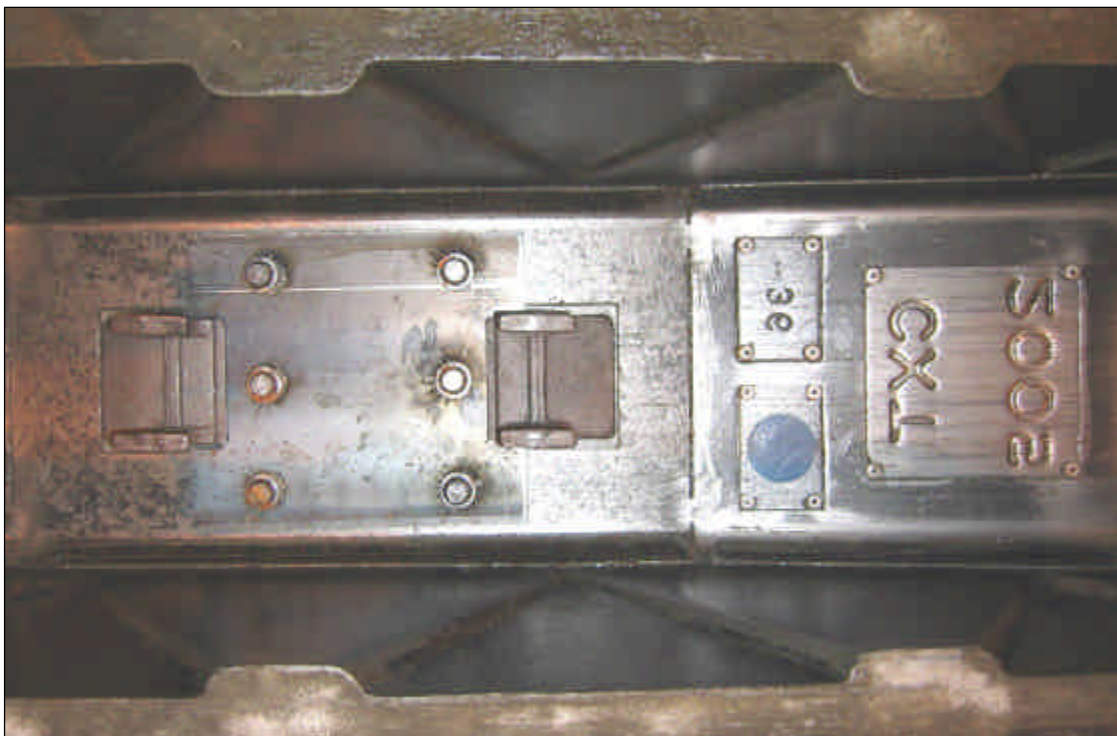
Studded Steel Plate In Tie Form Prior to Casting
